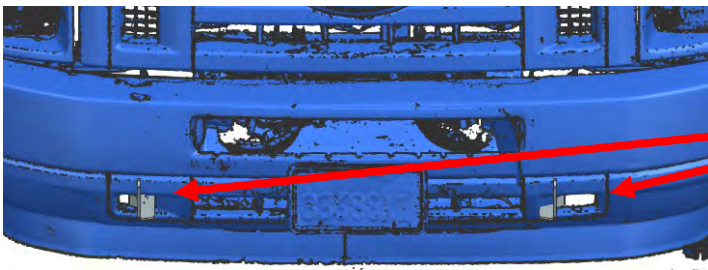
Attach mounting bracket 2 to mounting bracket 1
